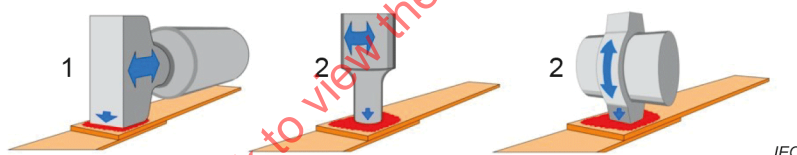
Ultrasonic welding process: 1) longitudinal, 2) torsional
